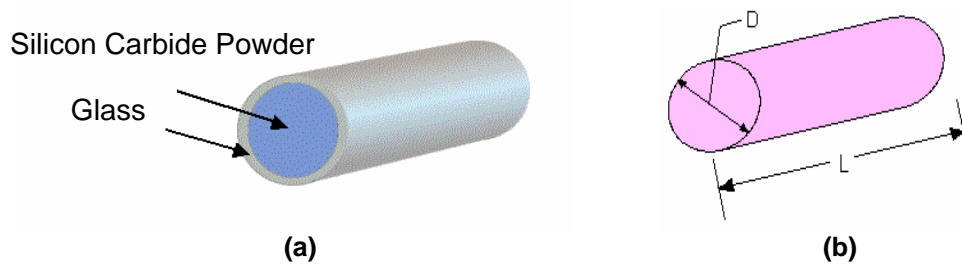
Fig. (a) silicon carbide insert; Fig. (b) model of the silicon carbide insert (neglecting glass coating).
